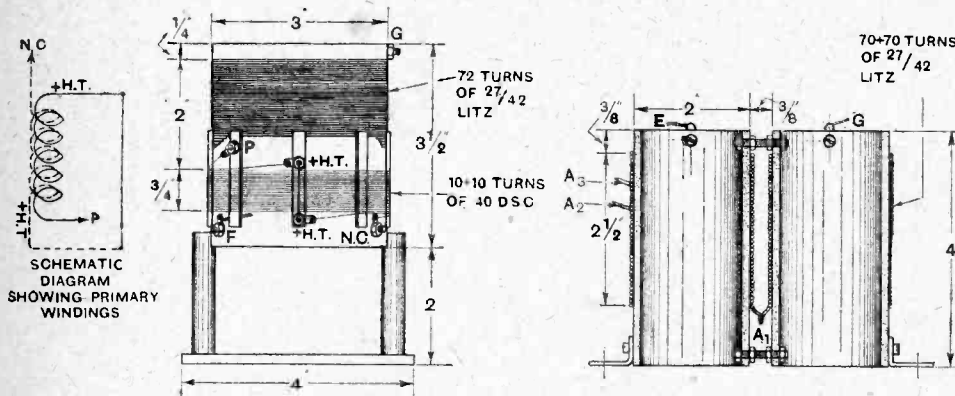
Constructional details of the H.F. transformer (left) and the aerial tuning coil (right).
